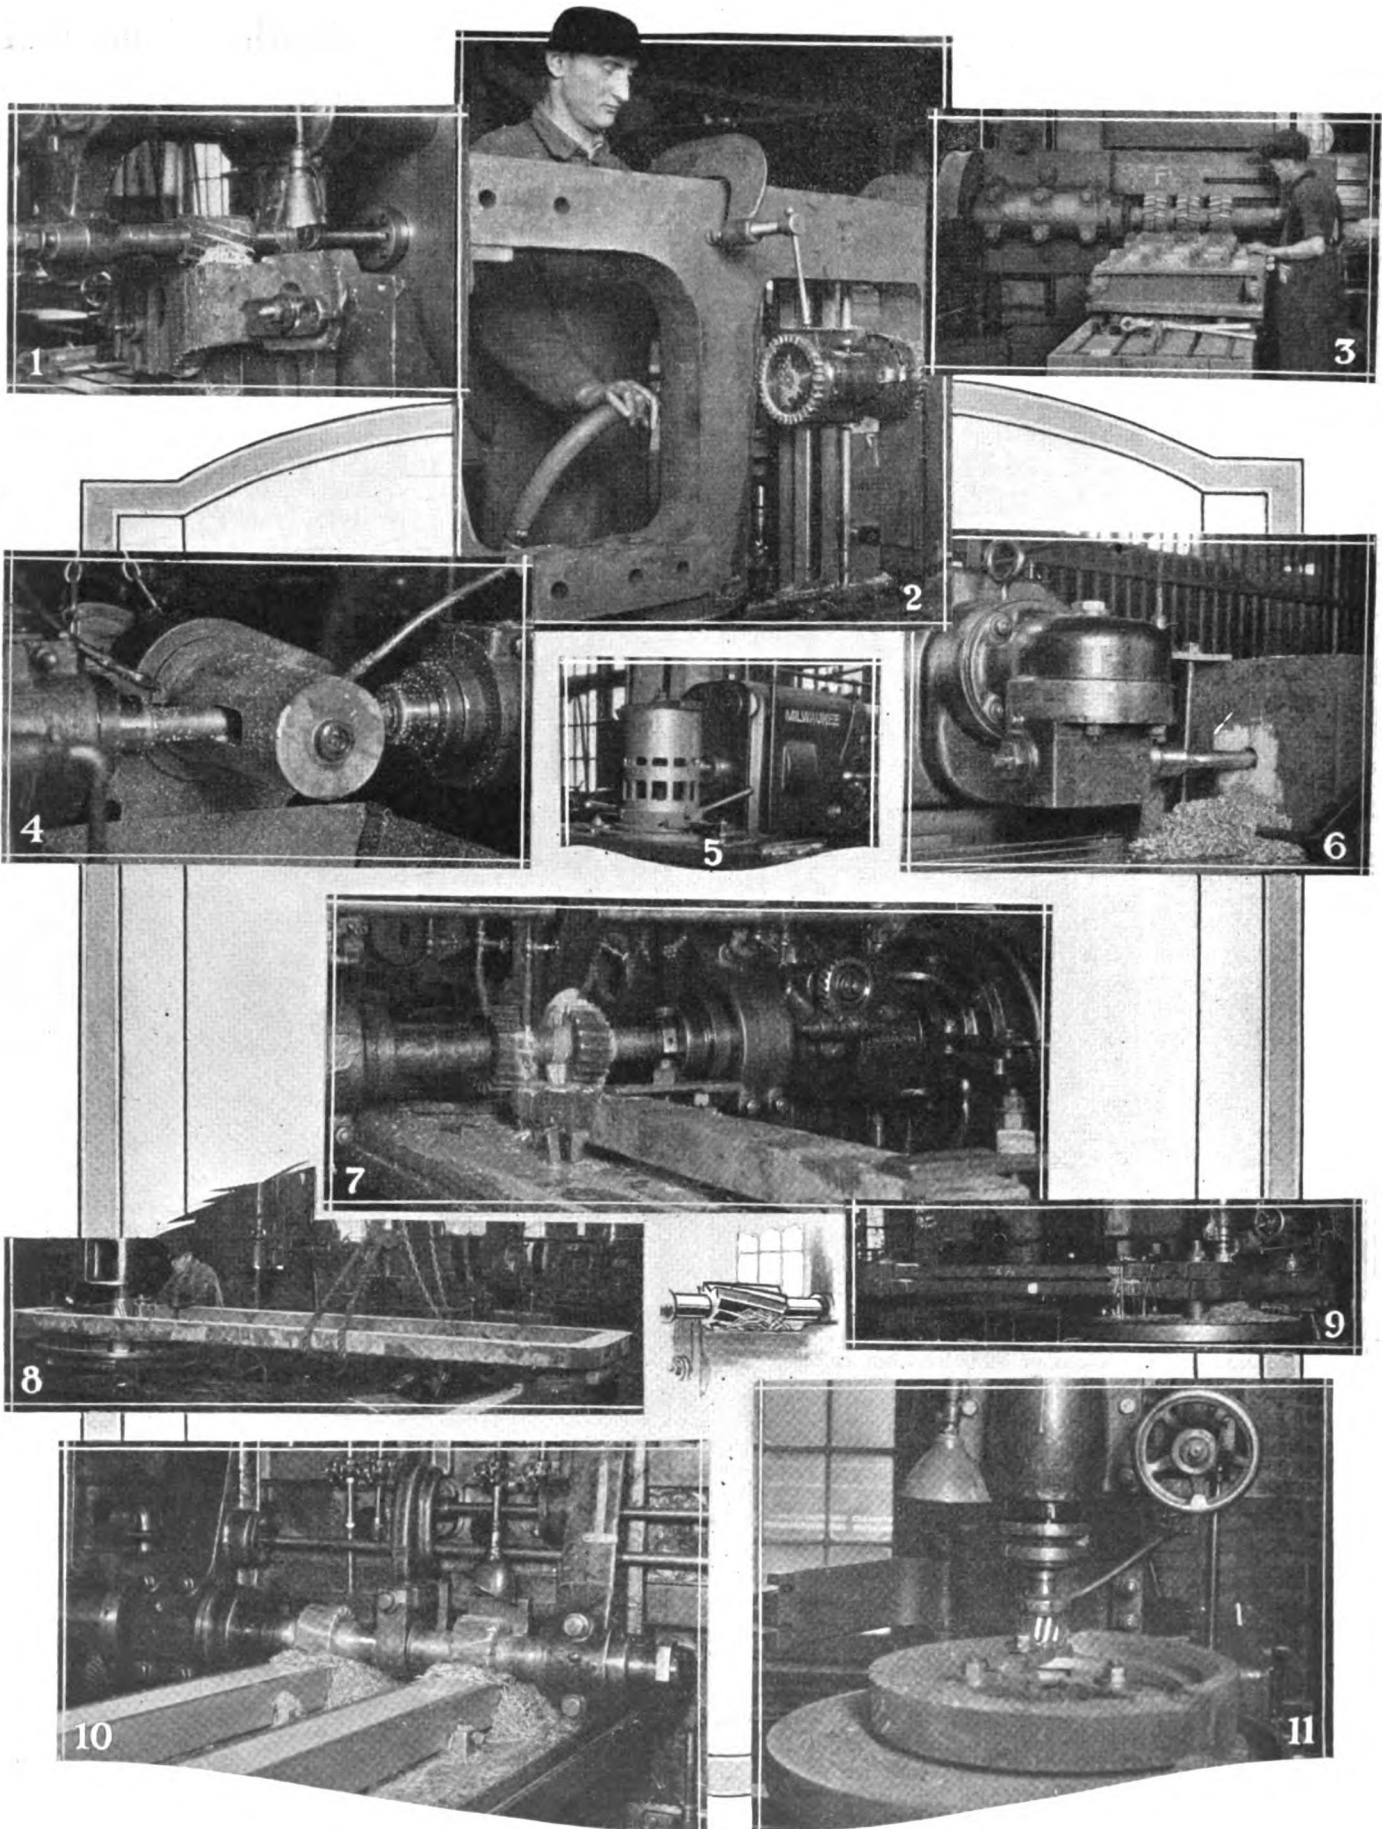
Milling contour of eccentric crank arm; Fig. 2—Facing driving box pedestal jaws; Fig. 3—Milling crosshead shoes; Fig. 4—Milling keyway in piston rod, using a helical cutter; Fig. 5—Milling ports in valve chamber bushing, using an end mill; Fig. 6—Cutting a die on a milling machine, using a special attachment; Fig. 7—Milling sides of crosshead guide, using a straddle cutter; Fig. 8—Milling the corners of a mud ring on a vertical miller; Fig. 9—Profiling the ends of two main rods at one set up; Fig. 10—Cutting channels in two main rods on a horizontal miller; Fig. 11—Milling the fit in a piston head rim.
